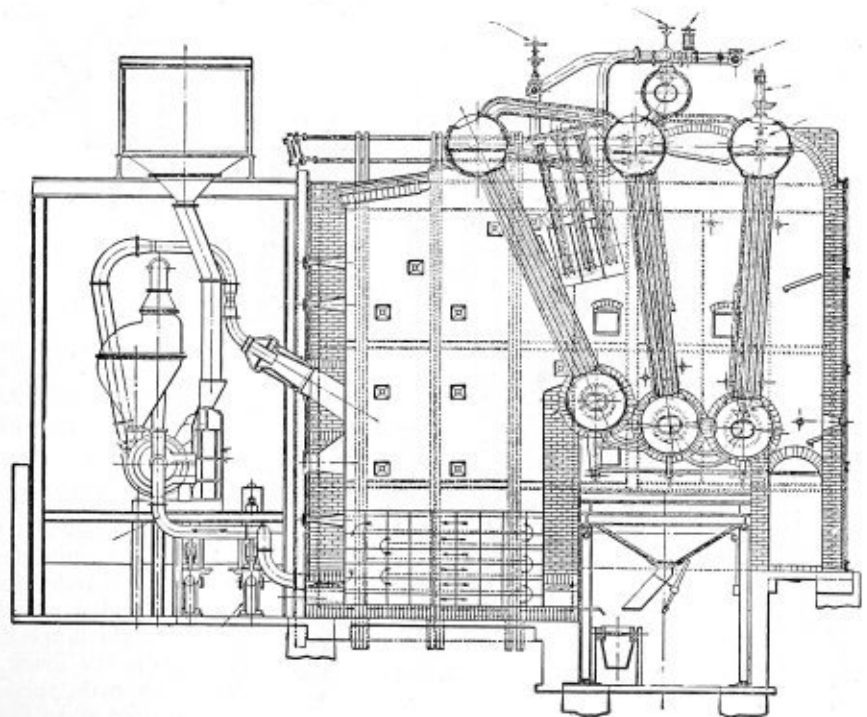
Woodeson type boiler equipped to burn pulverized coal
